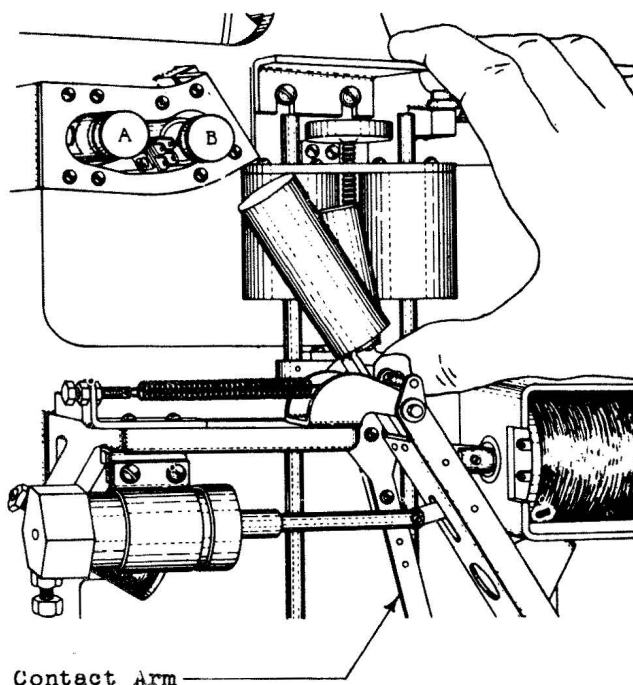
Method of Checking Clearance Between Contact Arm and Casting
